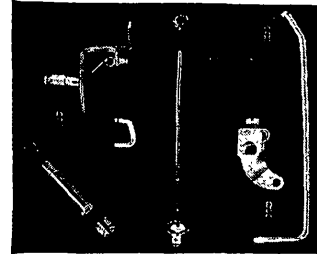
Assemble parts controlling high speed circuit. Check pump arm and counter-shaft for wear, and for loose lever. If metering rod shows wear, replace throat and jet. New nozzles should be used whenever carburetors are serviced
